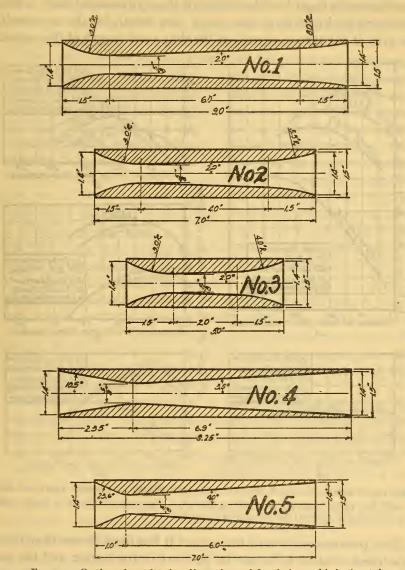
Section views showing dimensions of five designs of injecting tubes
